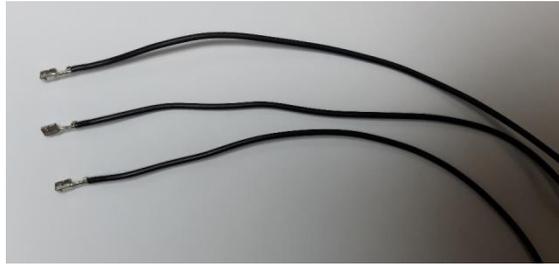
Pre-terminated wires to be soldered on the Hall sensor board.
